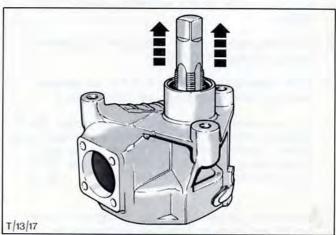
Remove rocker shaft bush using 7/8 BSP tap.
